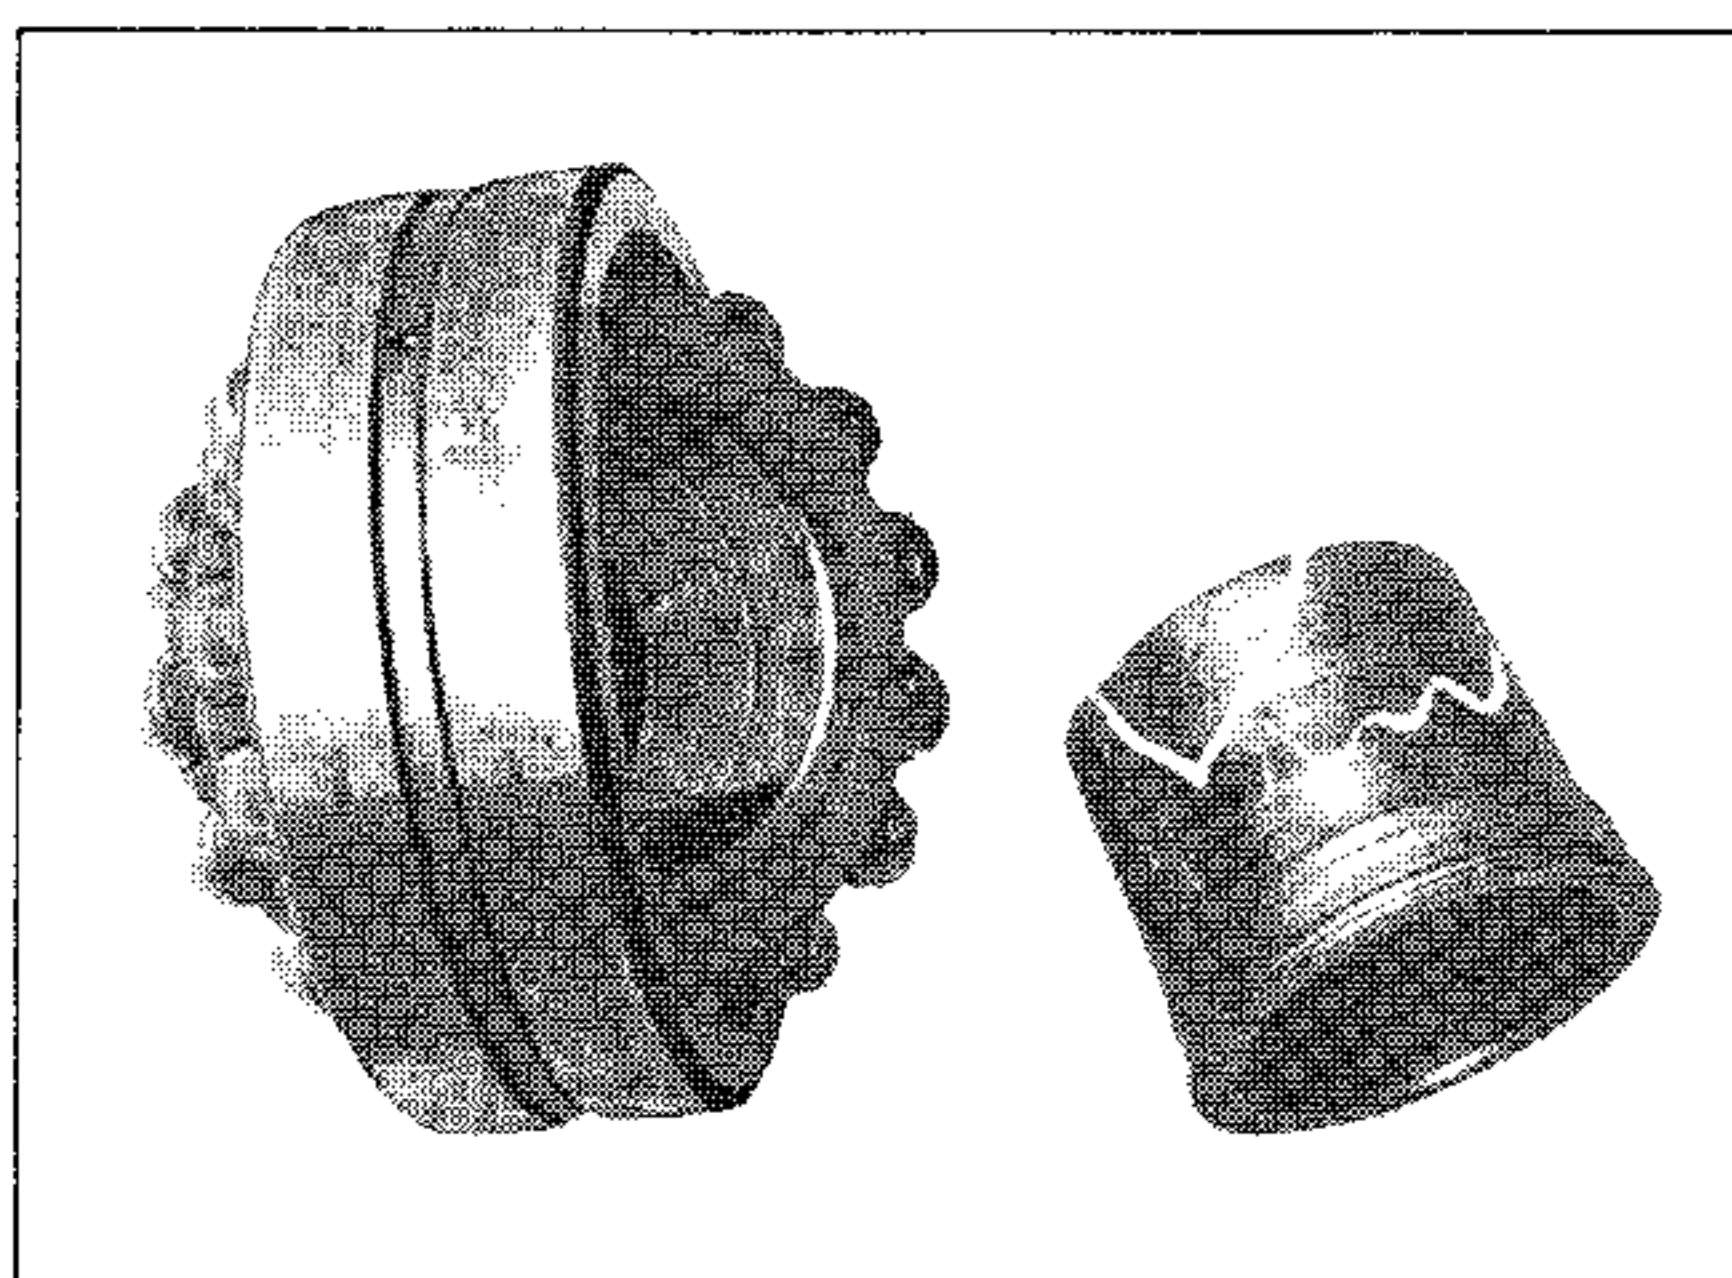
The damaged rear bearing from Case 6. Detecting this fault had not been easy as measurements were only possible on the front-side bearing. To overcome this problem it would be necessary to permanently mount accelerometers on the rear-side bearing housing and route the cables out to an easy point of access
